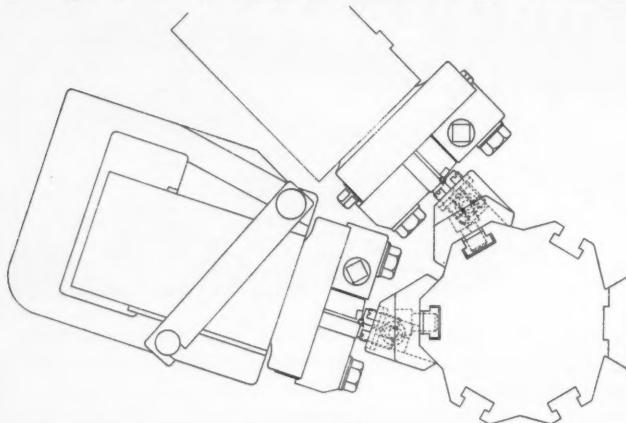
Drawing of "V" Support Used with Shaving Tool
